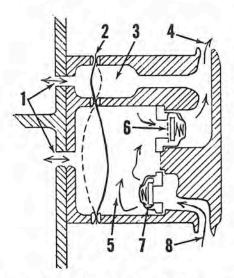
Schematic view of diaphragm type fuel pump, Pump body mounts on side of cylinder block and is ported to two crankcases as shown. Six cylinder models use two fuel pumps.
